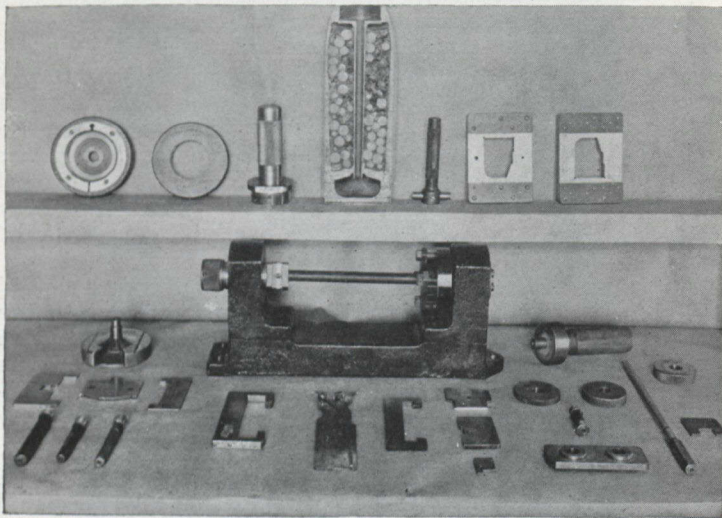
Set of Gauges for Component Parts of 18 Pr Shrapnel Shell.
